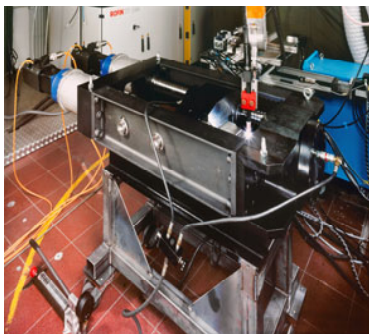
Controlled Tensile Weldability (CTW) test machine, where coupon is pulled in tension during welding.
